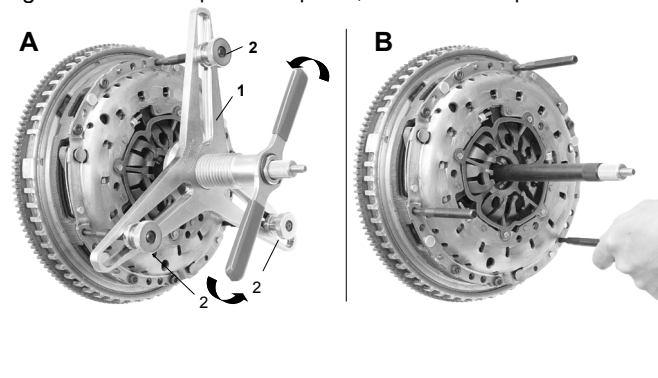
Turn back pressure spindle, remove clutch pretensioner.
